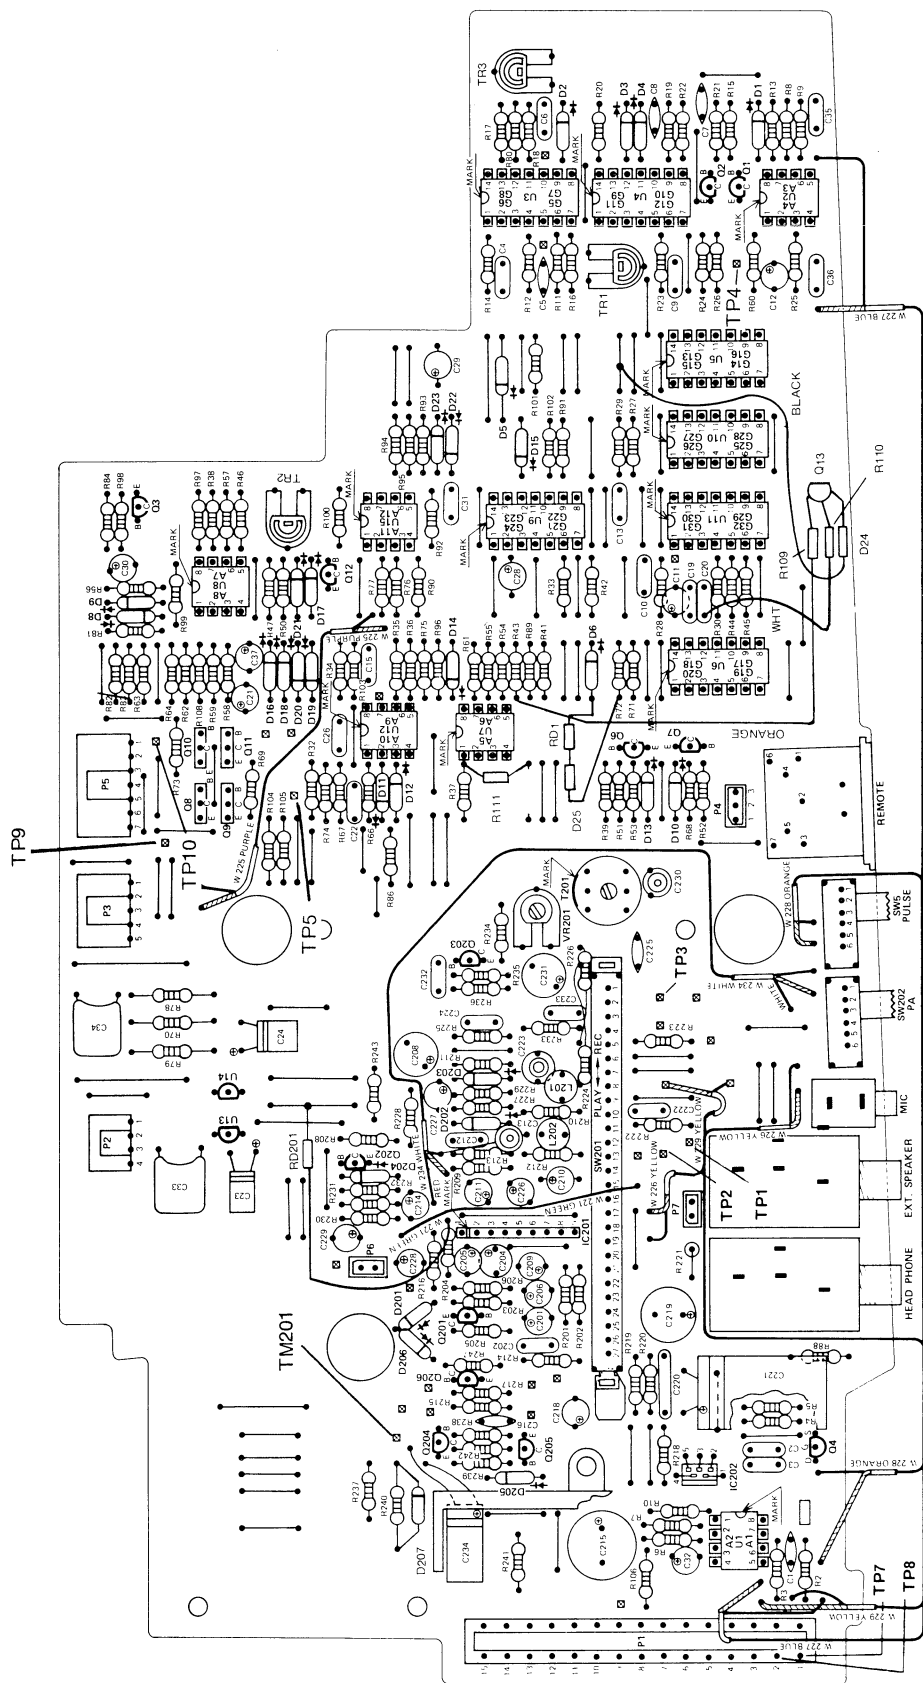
Figure BA. Tray Motor and Digital Filter Test Points (Component Side, Main PC Board)
